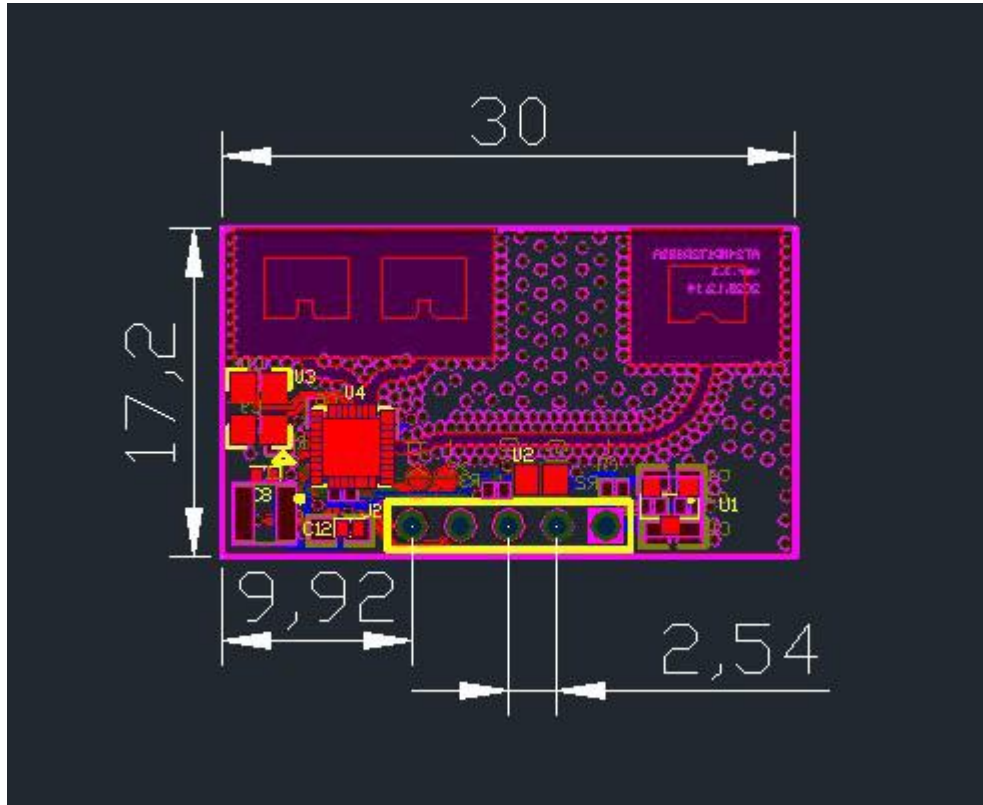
Mechanical dimensions of radar sensor AT24MP1T2RS32A
